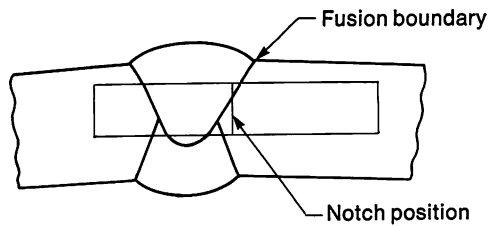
Typical configuration for seam weld HAZ Charpy test.
